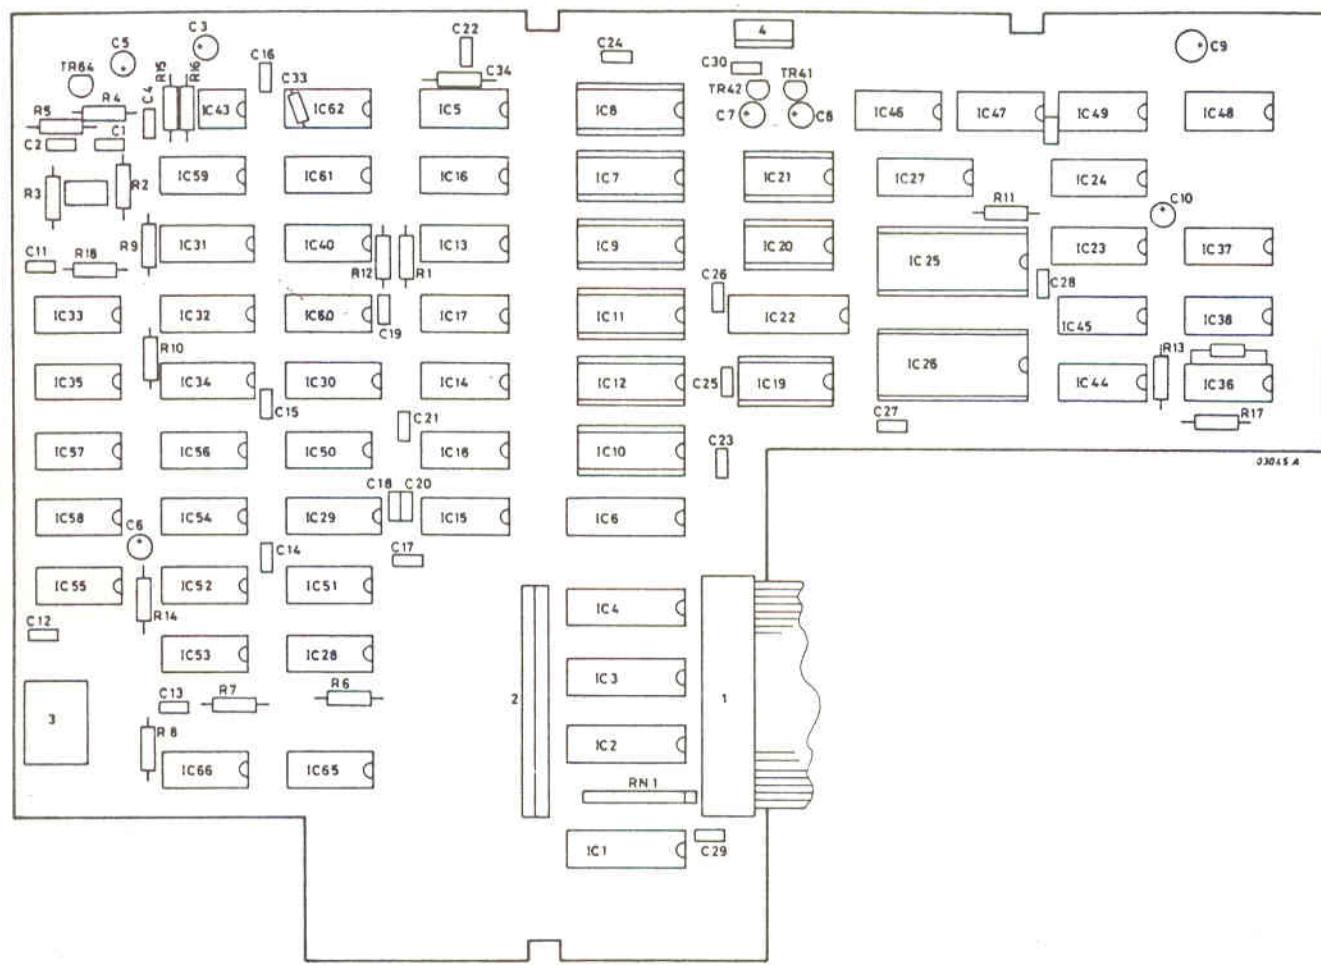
COMPONENT LAYOUT VIDEO BOARD
